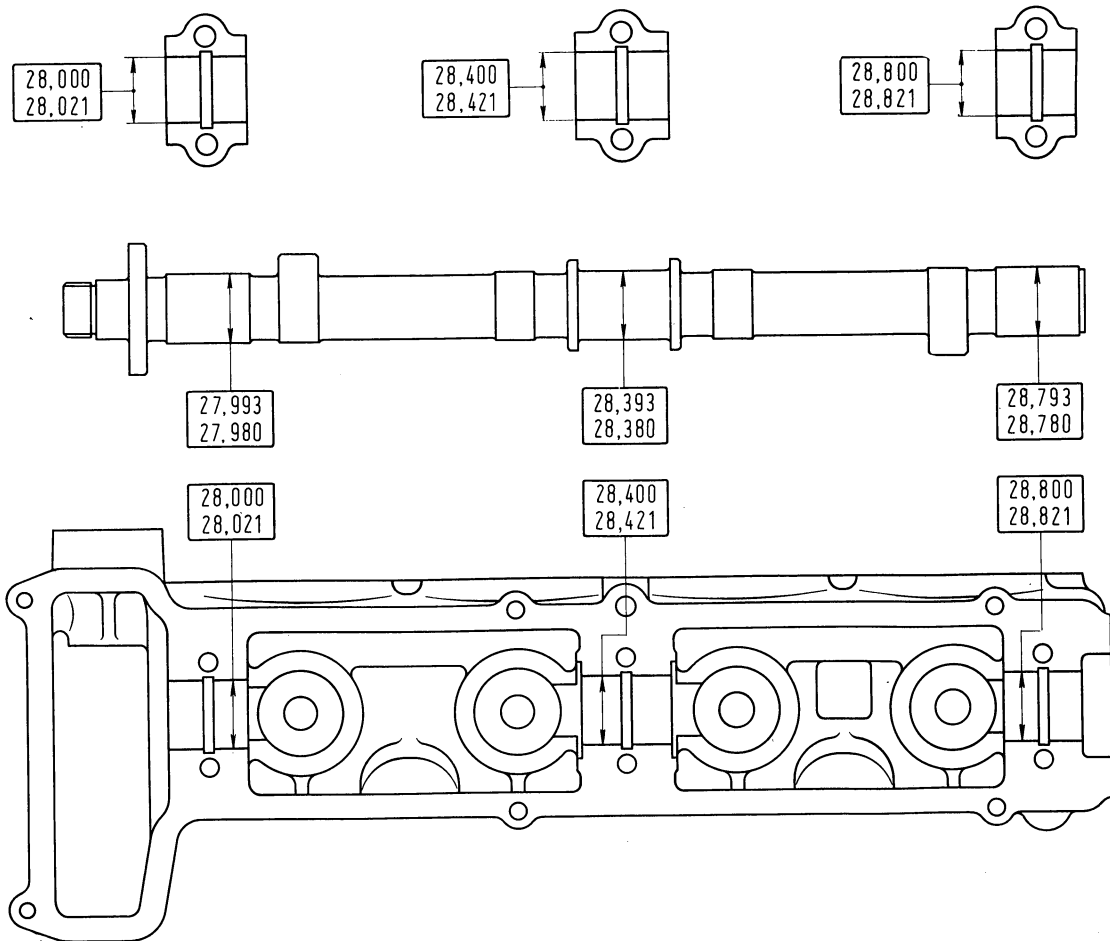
Critical dimensions (in mm) of 118 B.000 engine camshaft journals and bearings.
